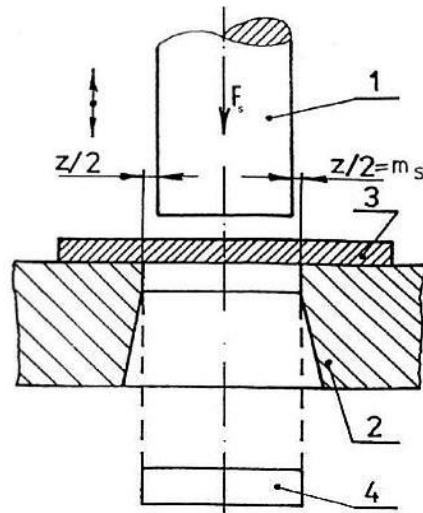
Shearing tool, z - die clearance, m_s - blade gap, 1. Shearing punch, 2. Shearing die, 3. sheared material (sheet strip), 4. Sheared material (blank)
